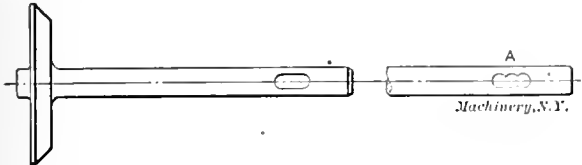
Oblong Slot drilled in the Jig shown in Fig. 2
